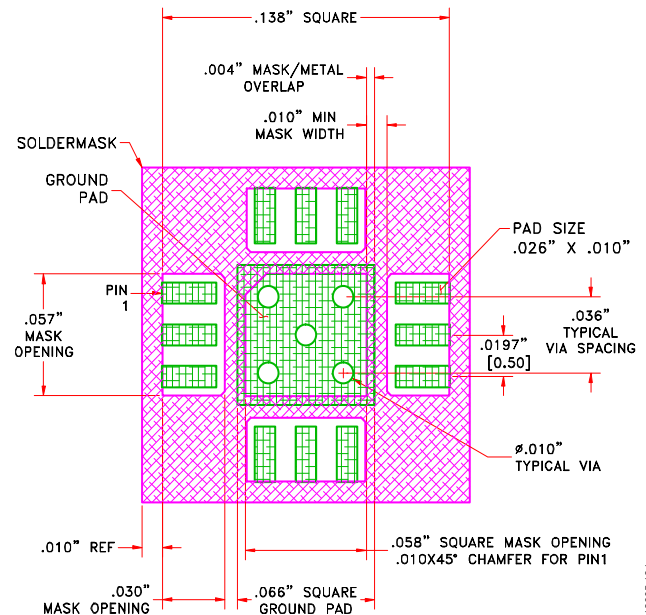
PCB Land Pattern Footprint of the EV1HMC524ALC3B
